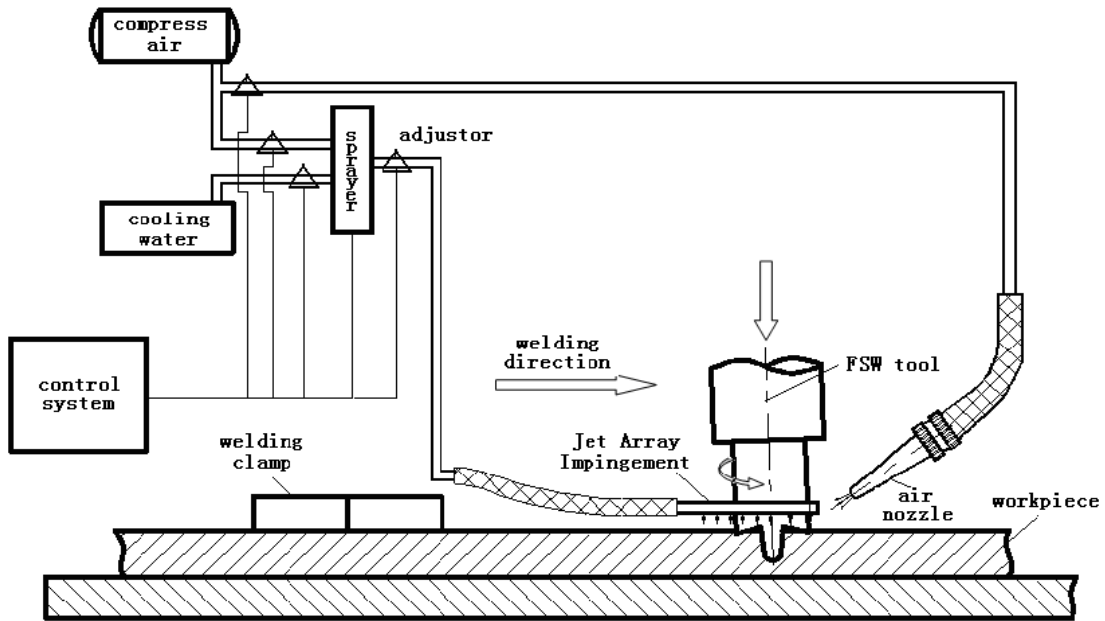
DC-LSND FSW assembly with trailing jet array and leading air cooling [38]
